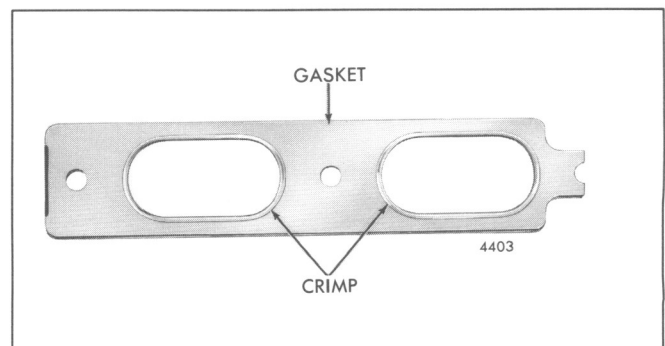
Metal Clad Exhaust Manifold Gasket
